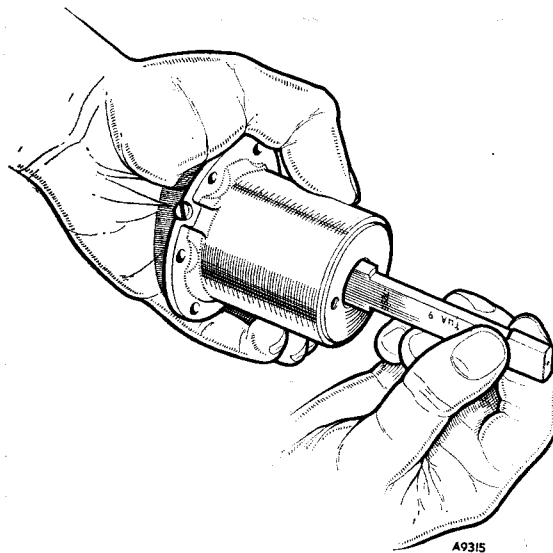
Checking the housing small bore diameter using gauge TUA 9
